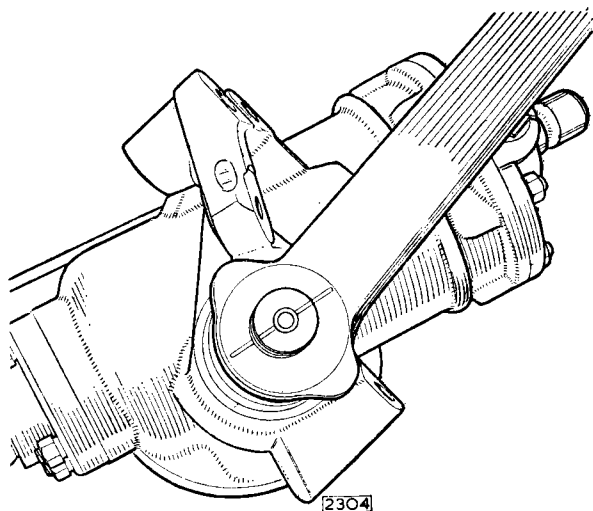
Showing the alignment of the drop arm/rocker shaft marks
